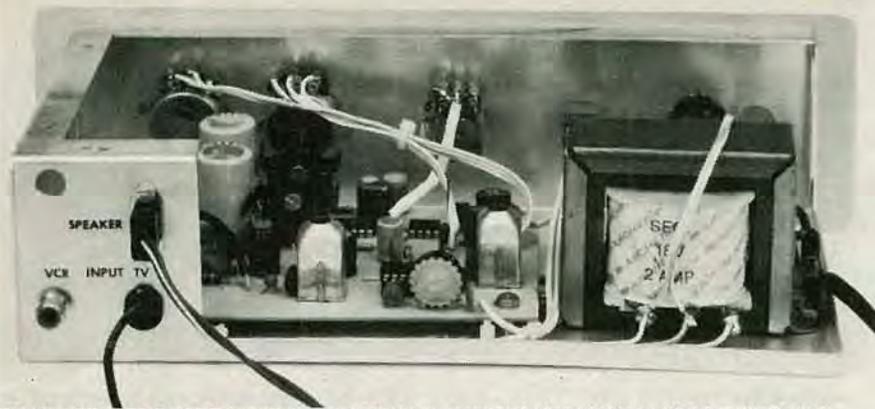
THE OFF-BOARD components should be mounted before they are wired to the board.
